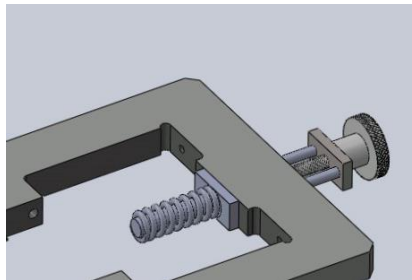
CAD Model of Spring, two blocks and guide pins assembly
